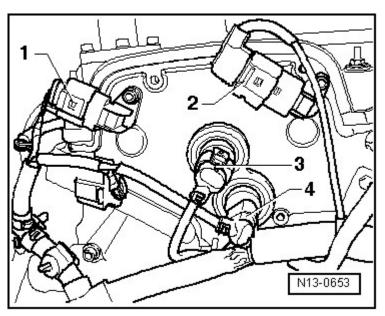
Identifying CMP Sensor G40, CMP Sensor 2 G163 And Connectors Courtesy of AUDI OF AMERICA, LLC
